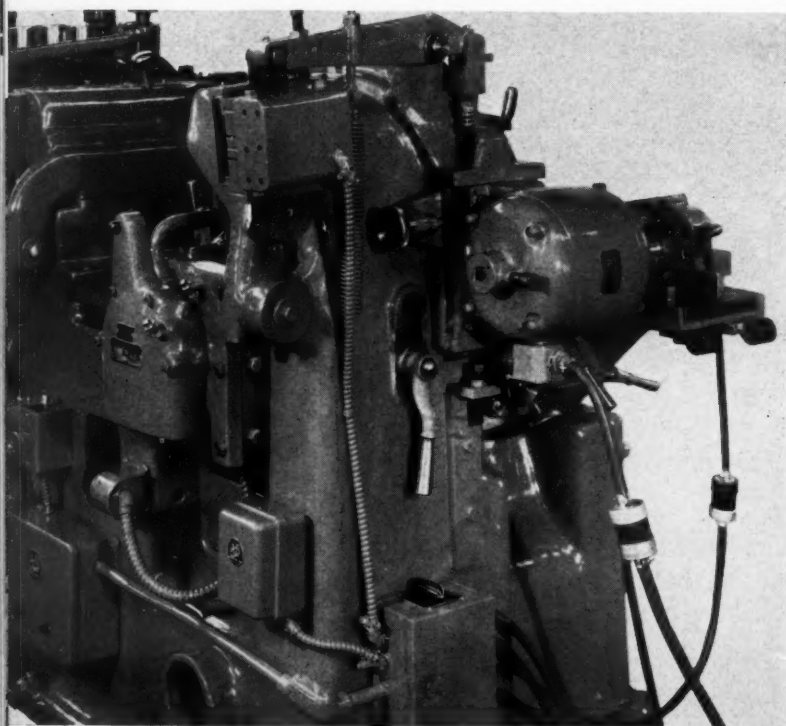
Heavy-duty solenoid is required where motor as well as cutter is moved
